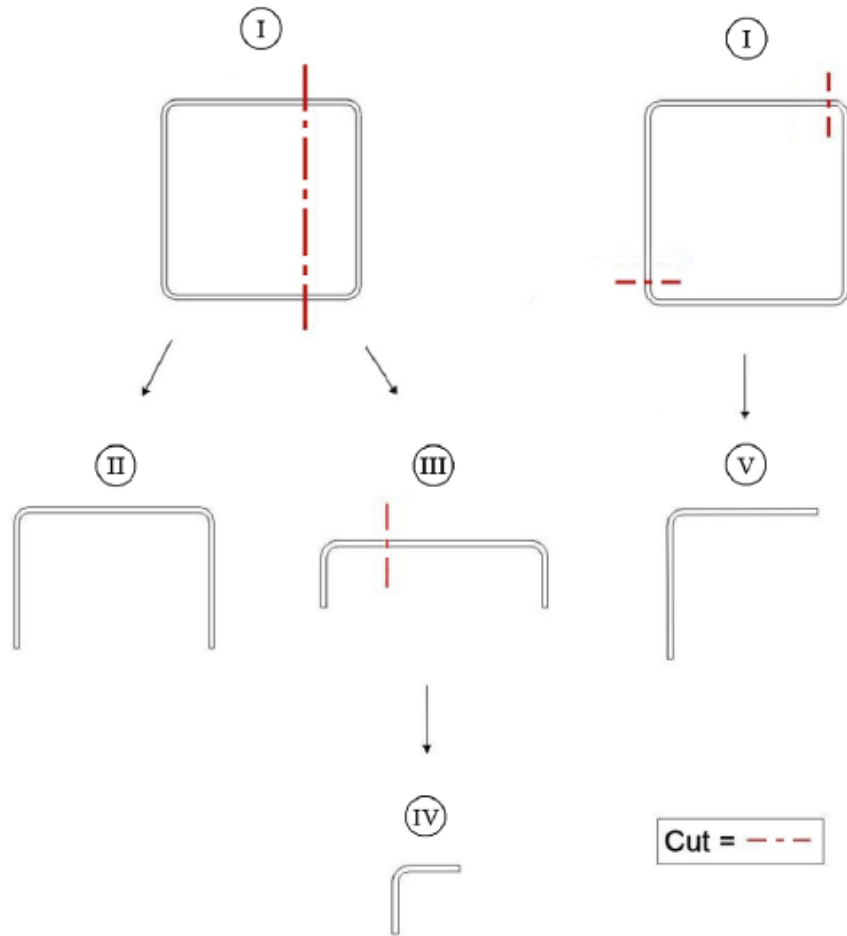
Schematic of machining operation performed to obtain channel test specimens II–V from the tubular specimen I
